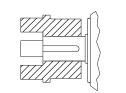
Place coupling flush with end of motor shaft and tighten setscrew.
